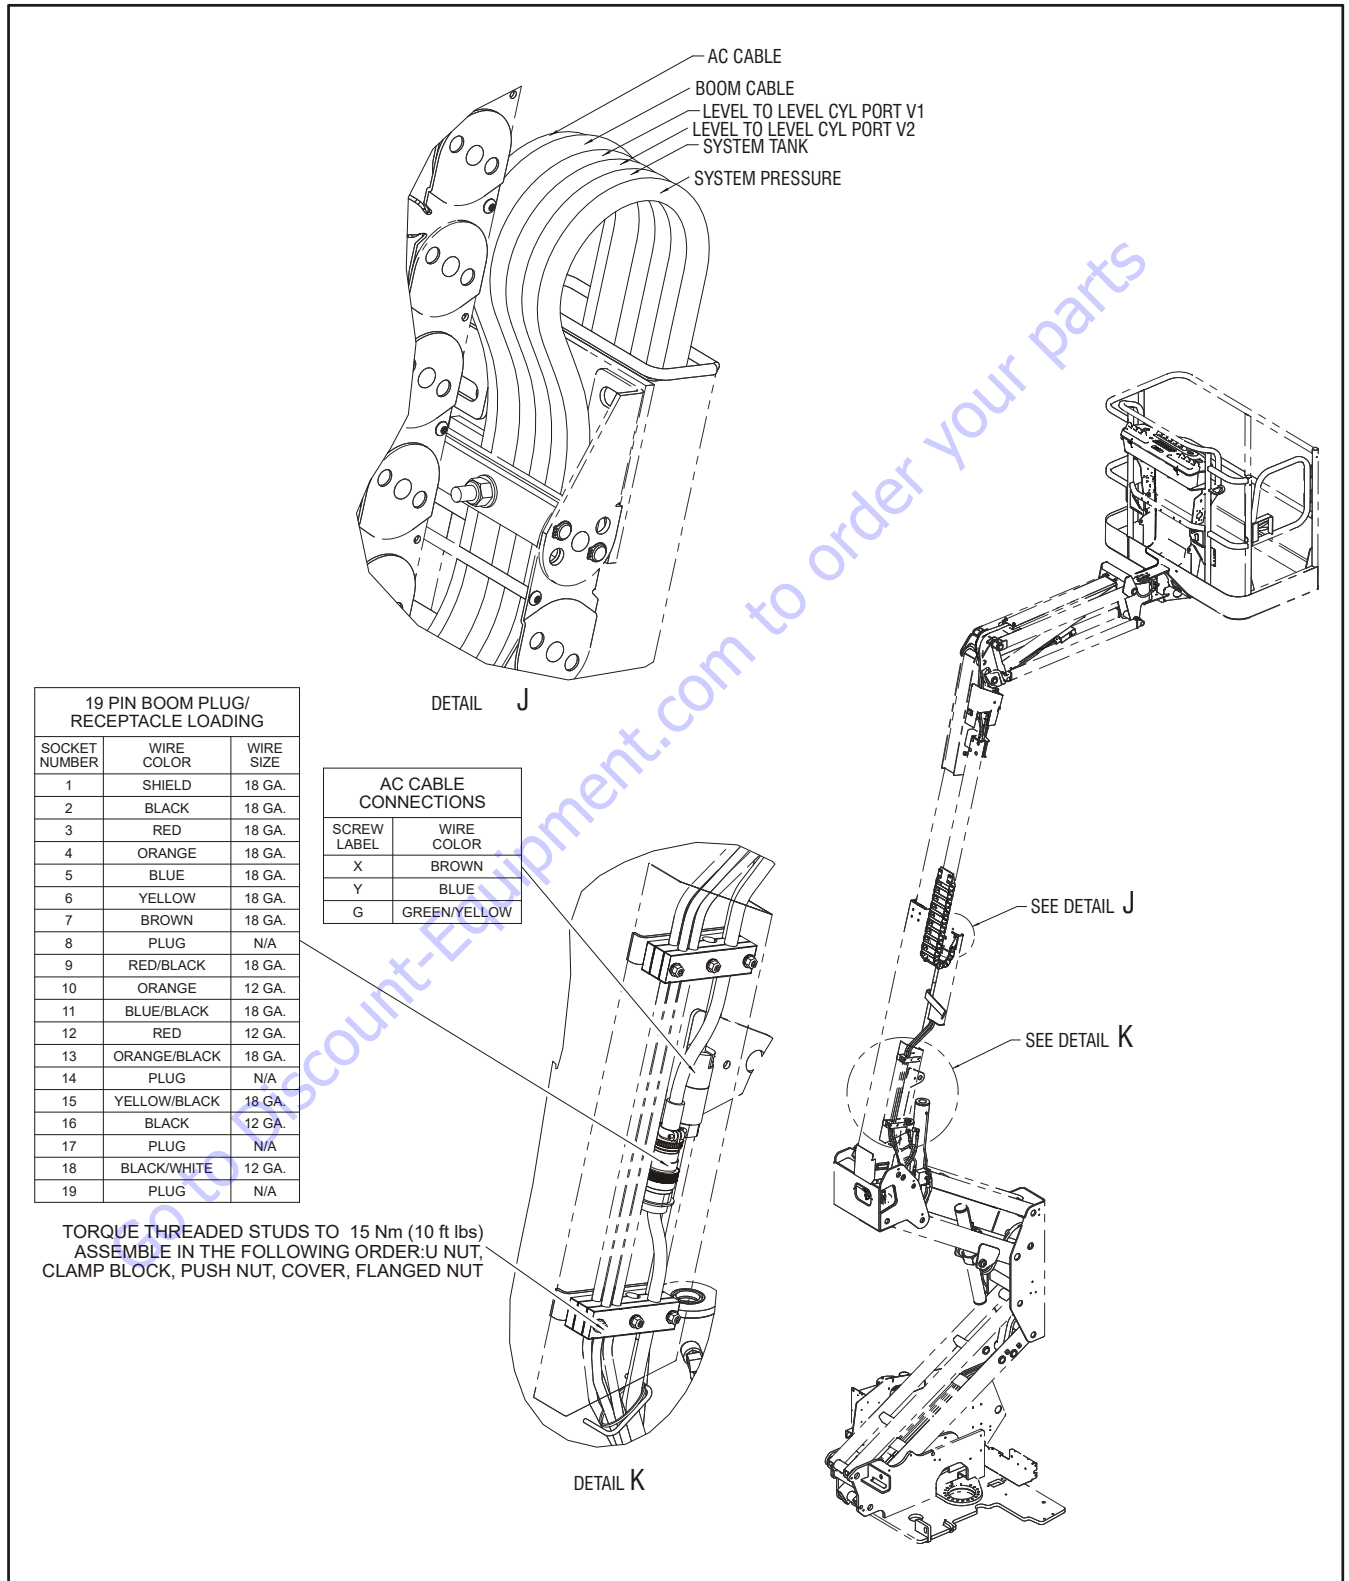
Cable Installation and Identification - Sheet 4 of 8
